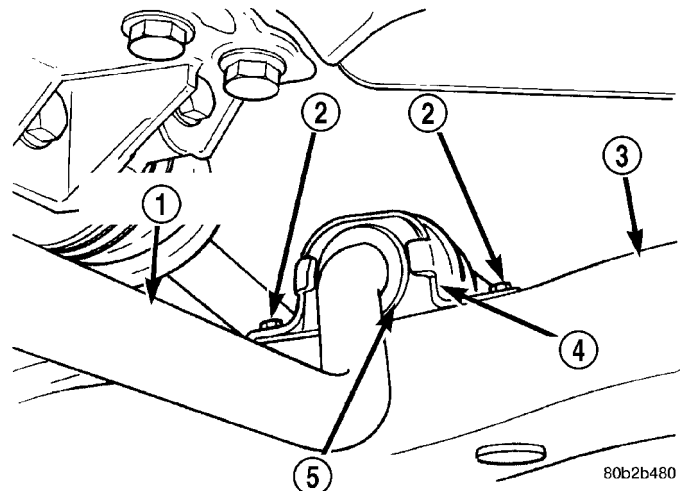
Stabilizer Bar Isolator Bushing Attachment To Cradle
